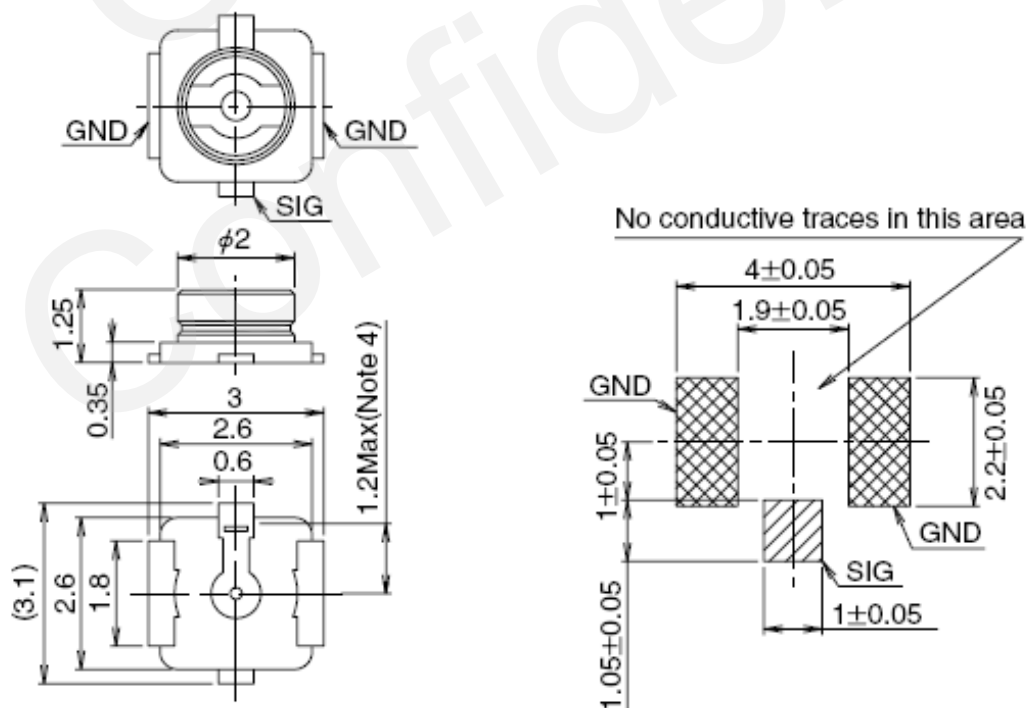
Dimensions of the UF.L-R-SMT Connector (Unit: mm)
